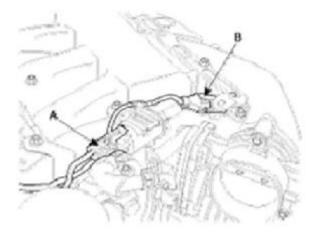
Identifying PCSV Connector Courtesy of HYUNDAI MOTOR CO.
